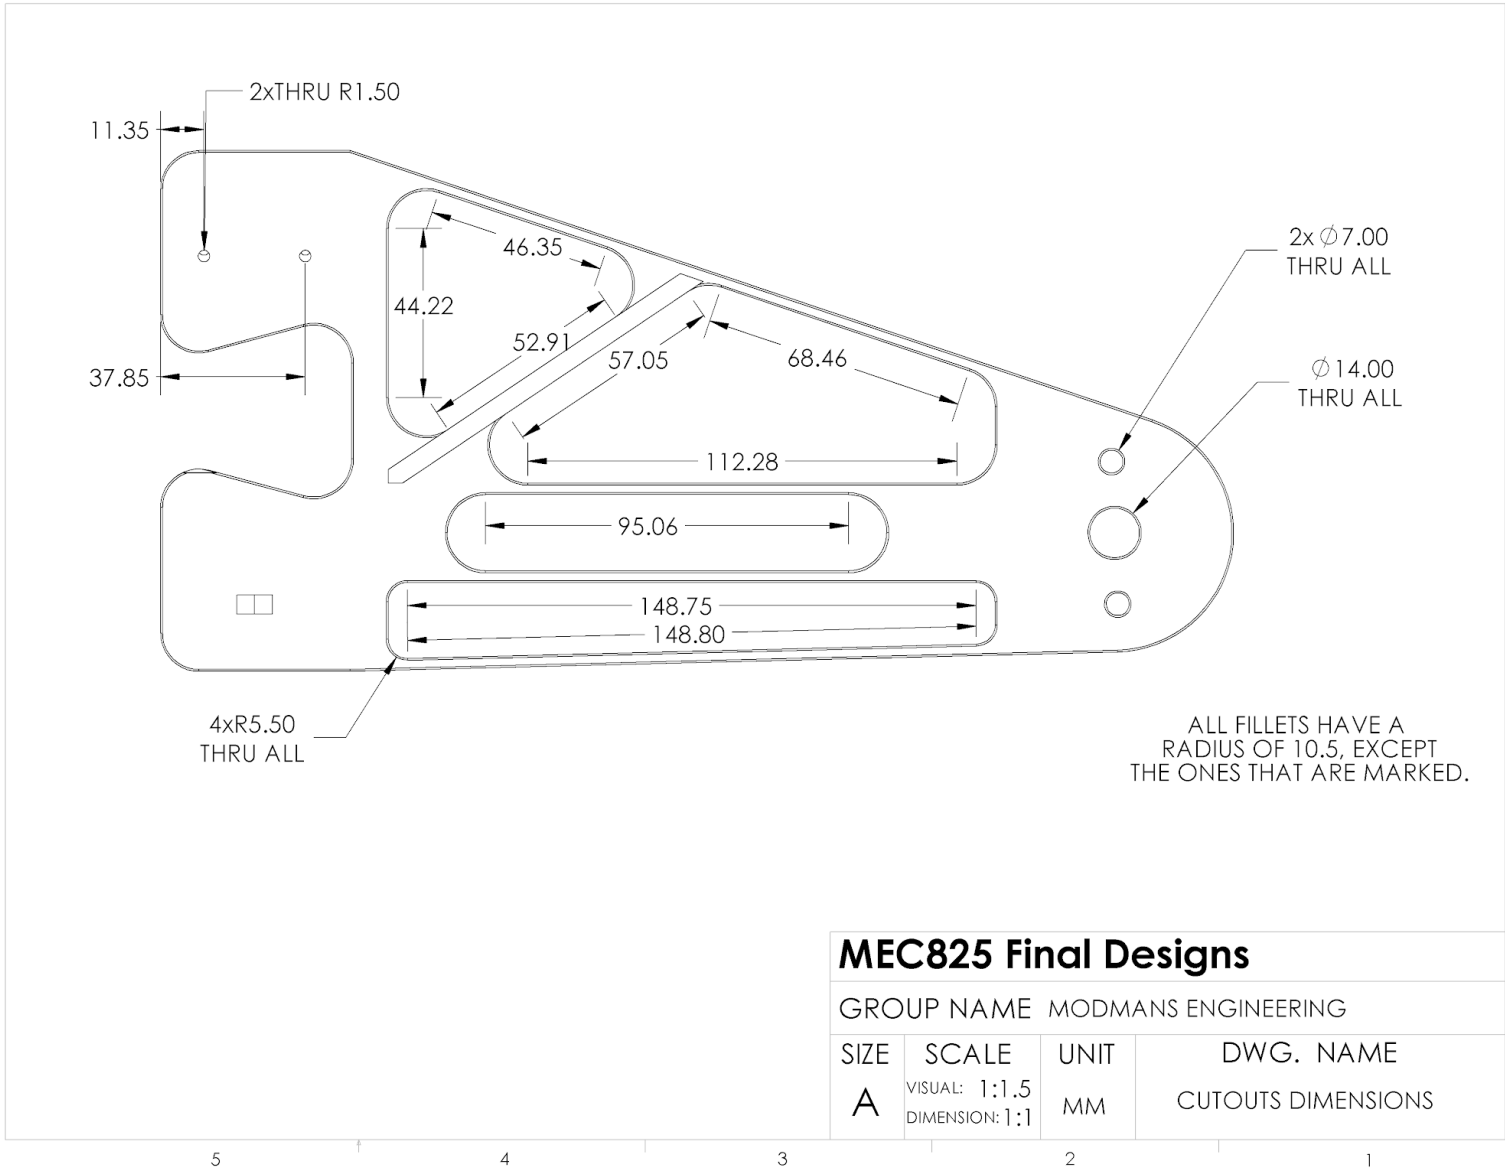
Wing Front Bottom Right Cutouts Dimensions
